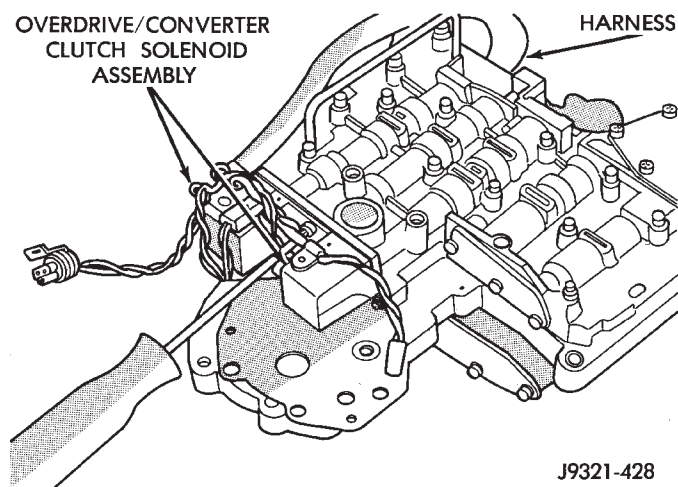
Removing Overdrive/Converter Solenoid Assembly Screws
